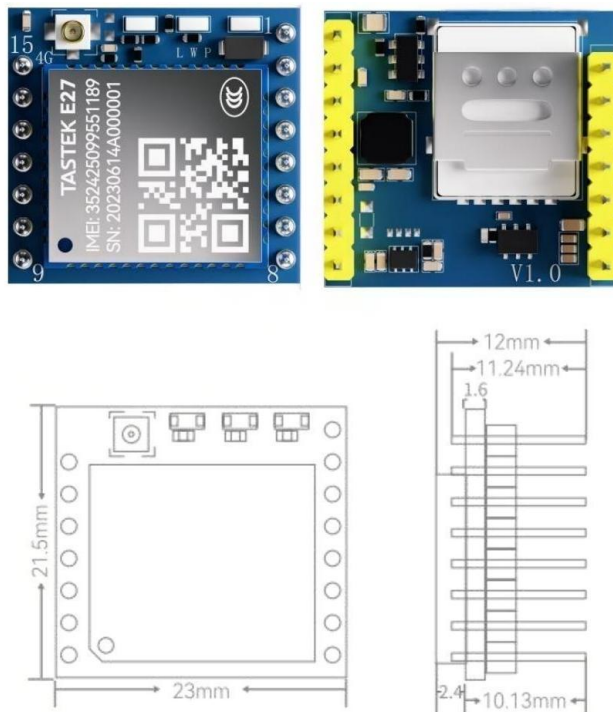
Appearance and Mechanical Dimensions of E27V-S
